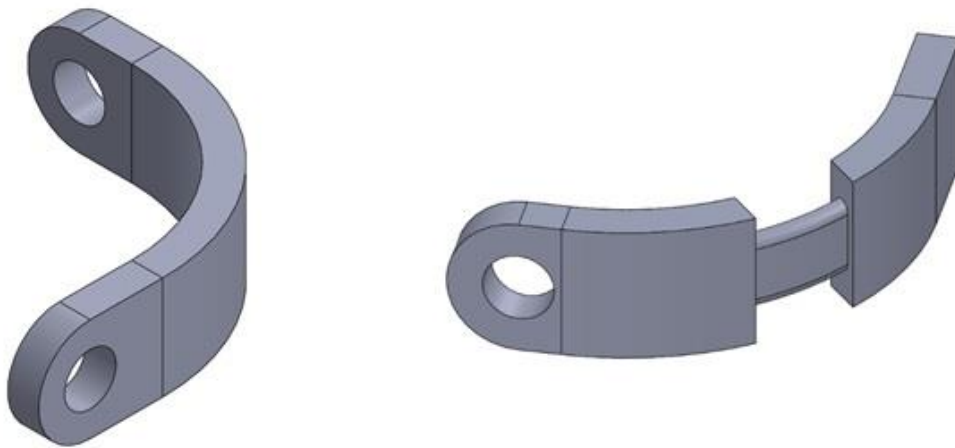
Initial shoulder-to-back link (left), final shoulder-to-arm-link (right)
